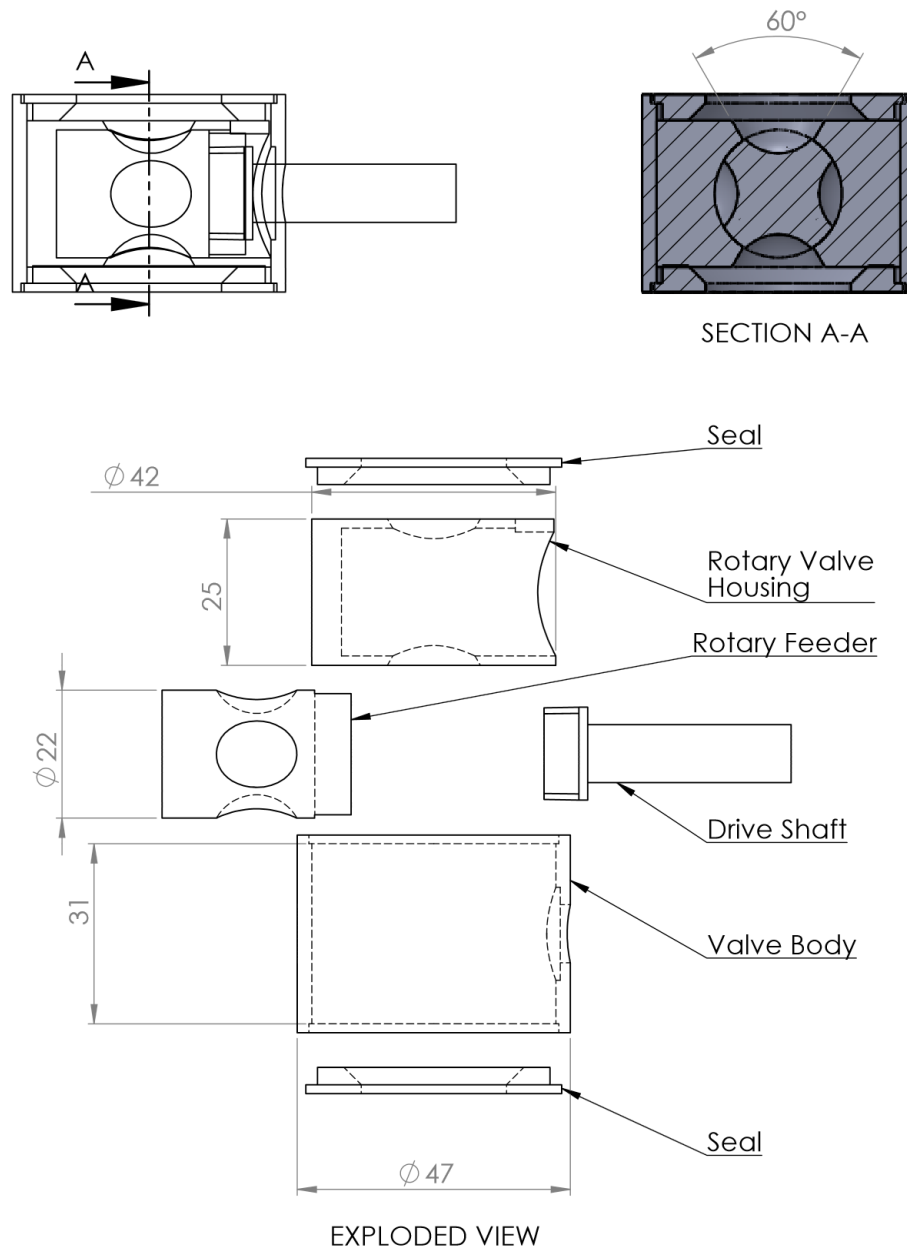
Valve, Brass housing and rotary feeder insert arrangement.
